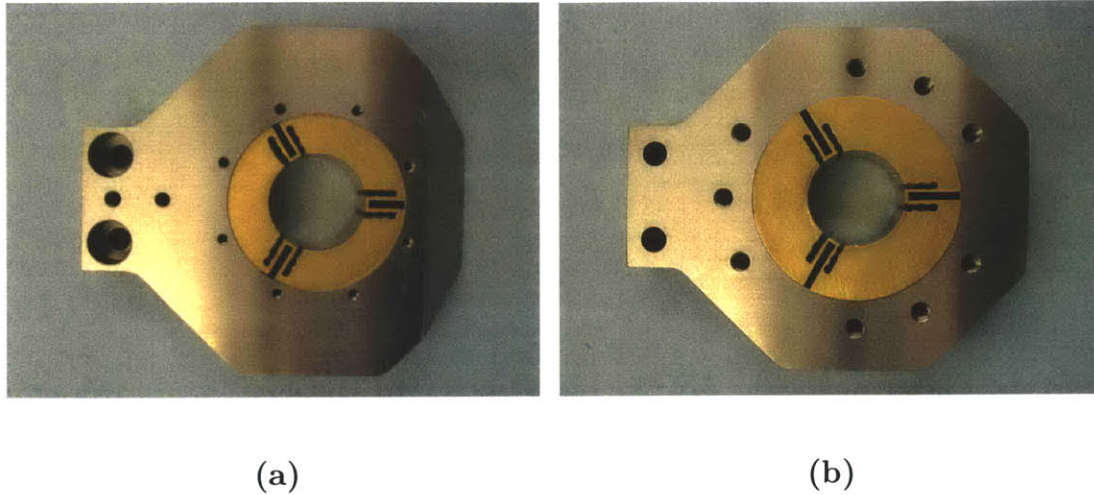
Holder with the collet in place (a) Top view (b) Bottom view
